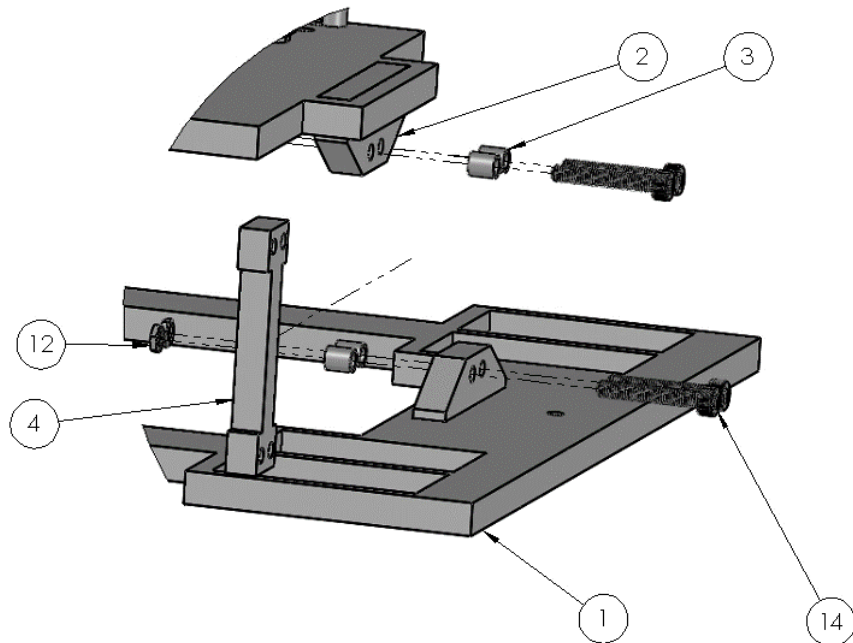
Detail view of base-drag load cell-intermediary platform (exploded view).
